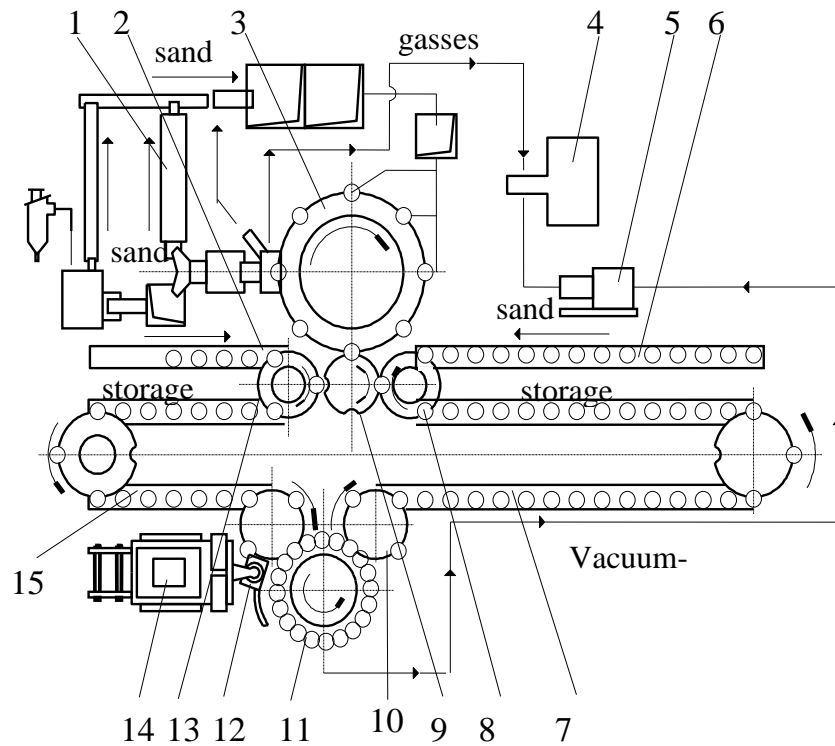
Scheme of rotor-conveyor line for manufacturing castings by using GAMODAR-process (productivity is 250-500 containers/hour)
